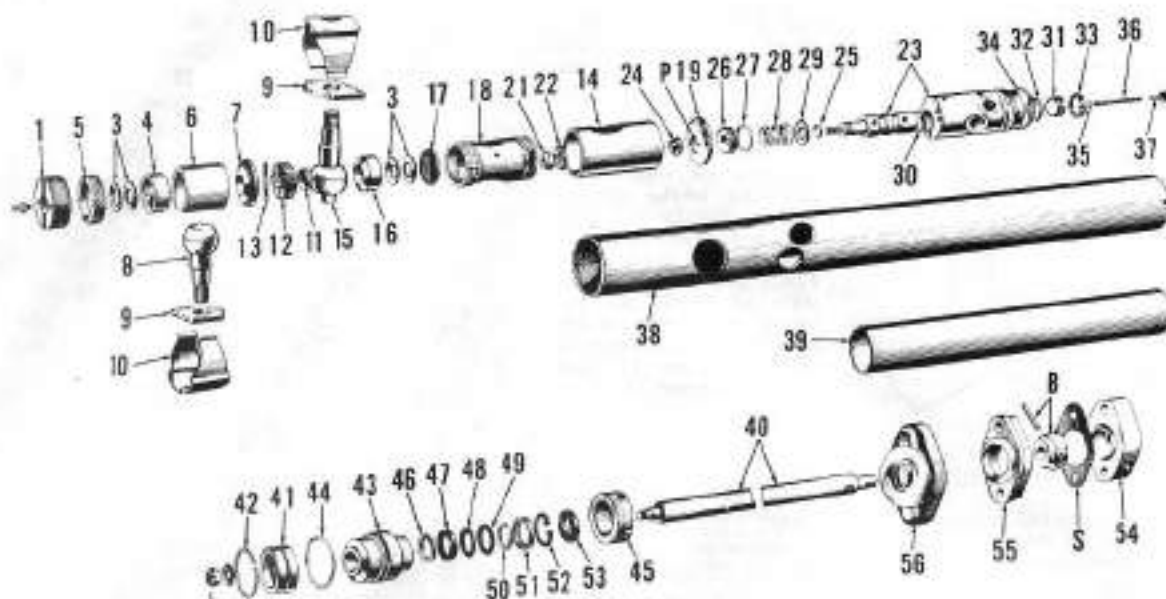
Exploded view of reactive type (steering effort increases with system pressure) steering cylinder and control valve used on early model 880 and 990 tractors. Refer to Fig. 26 for later non-reactive type cylinder and control valve. Refer to Fig. 25 for cross-sectional view of unit and for legend.
